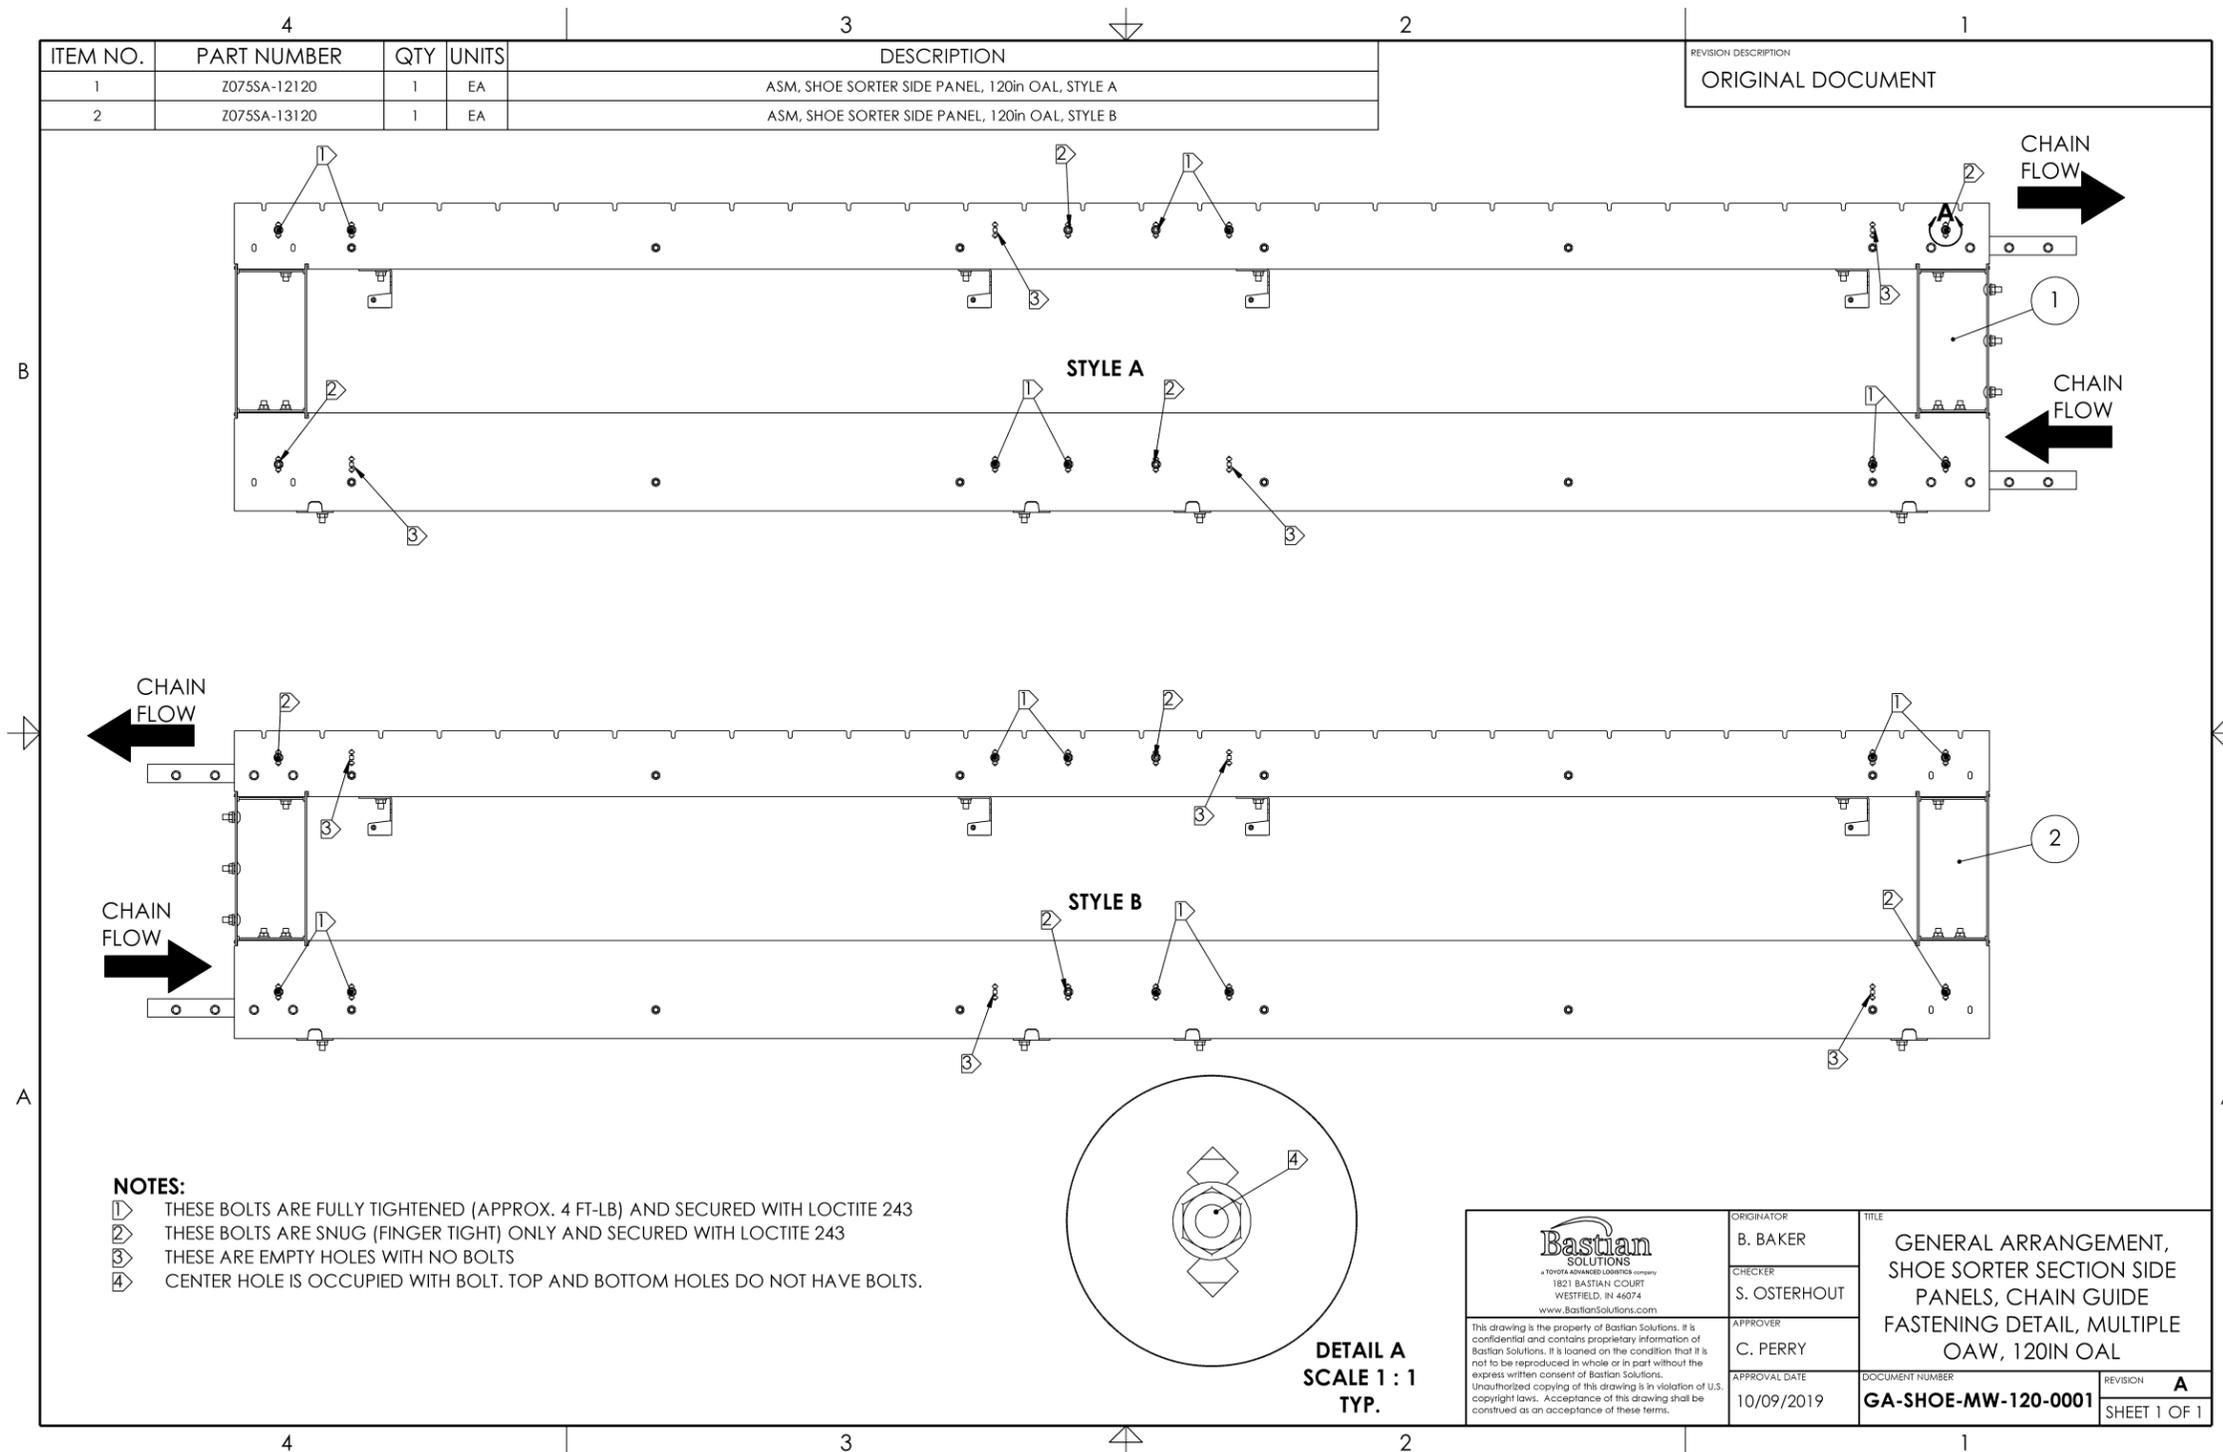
General Arrangement, Shoe Sorter Chain Guide Fastening Detail, Sheet 1 of 1
